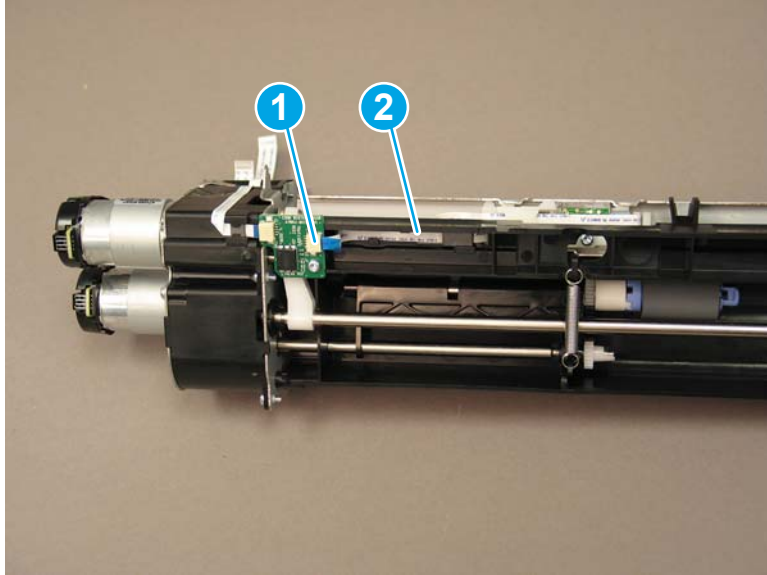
Disconnect one FFC and remove the Tray 1 separation assembly
